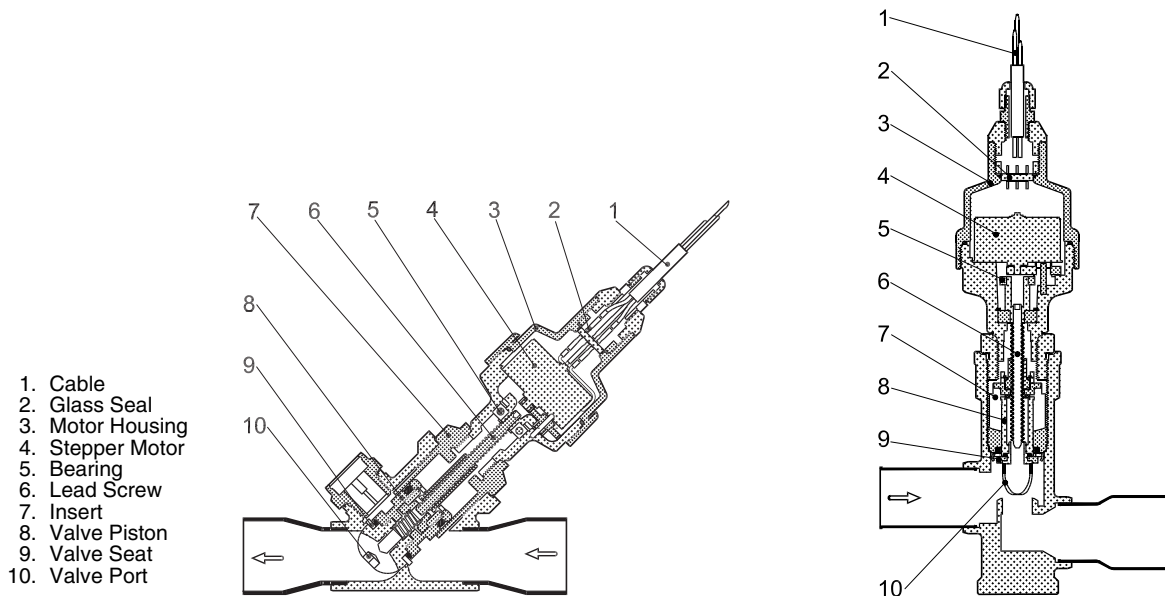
Cutaway Views of the Electronic Expansion Valve
